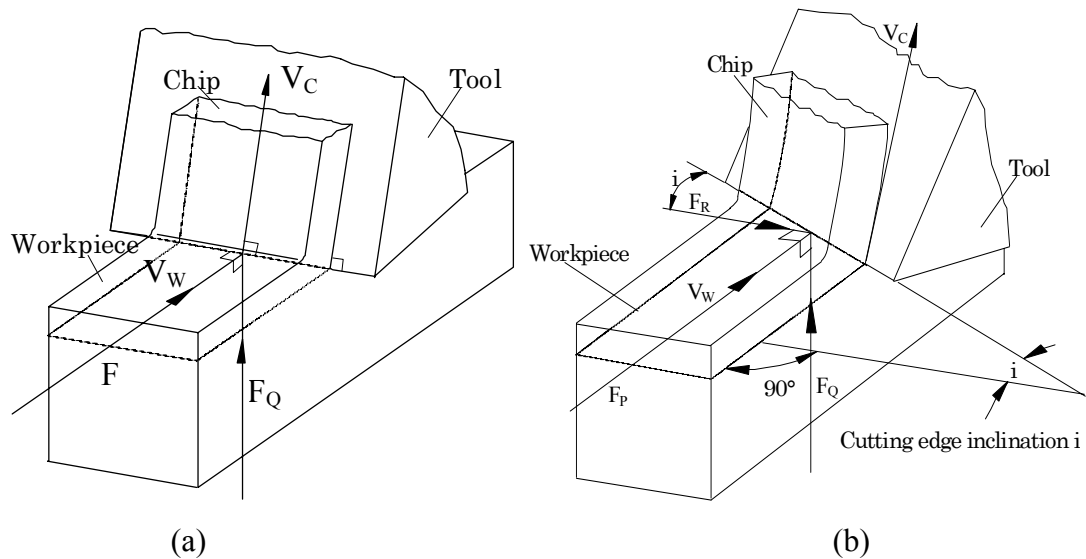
Types of cutting: (a) Orthogonal cutting, (b) Oblique cutting
